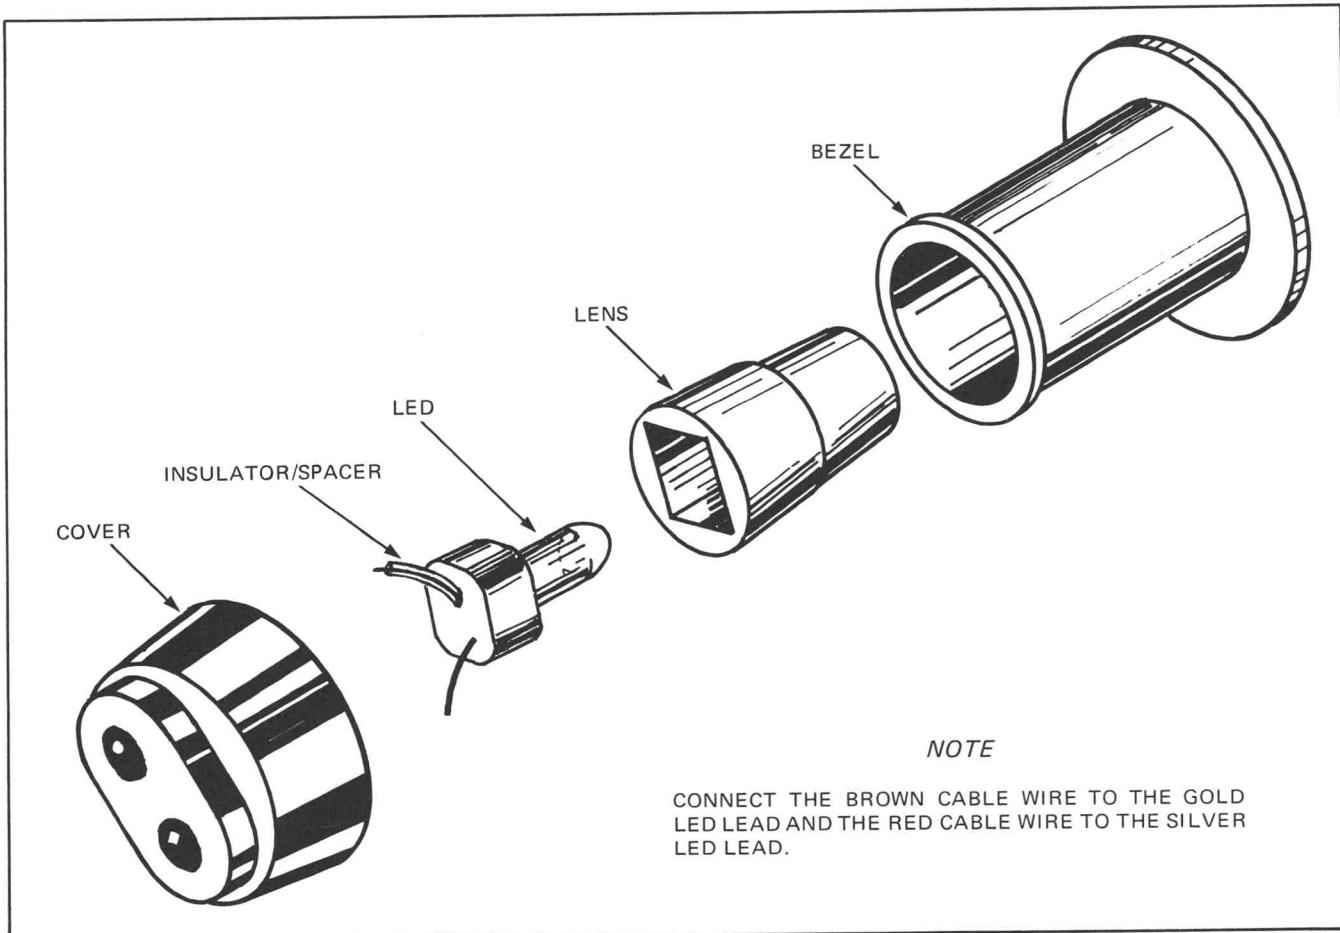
Lead Fault Indicator Lamp assembly.
